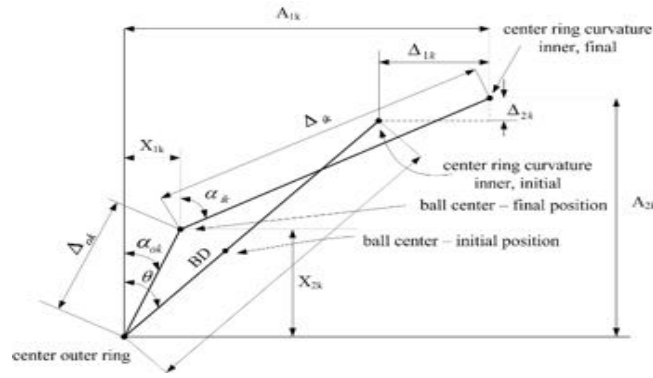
Geometry in the operation of the ball-ring assembly
